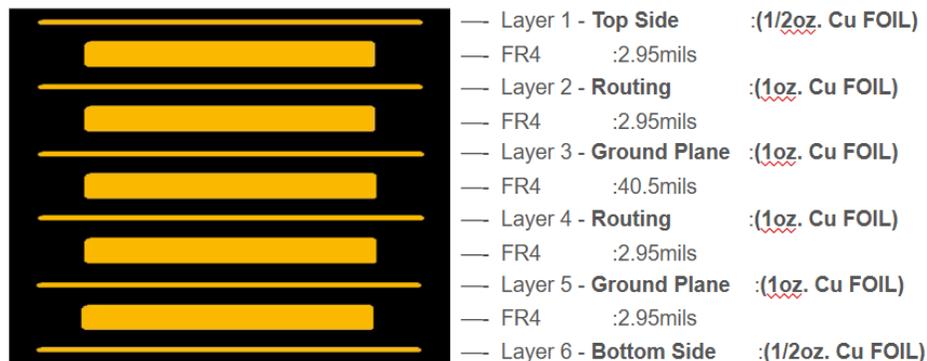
6-Layer Stack-up for ATM3405 BGA EVB
